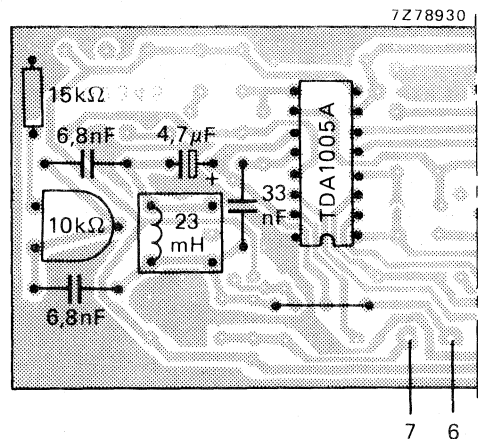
Printed-circuit board component side, showing component layout of Fig. 17.
